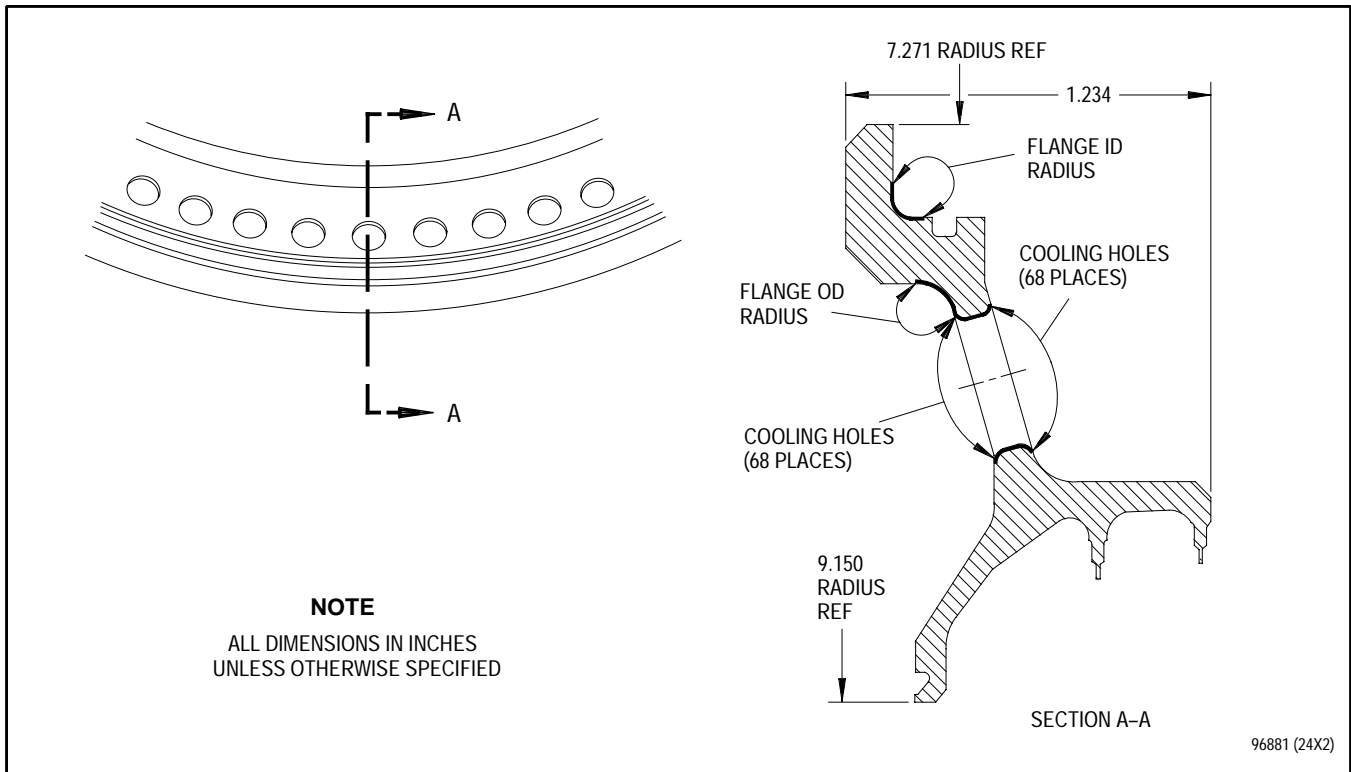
First Stage Turbine Blade Front Retaining Plate - Blend Repair
